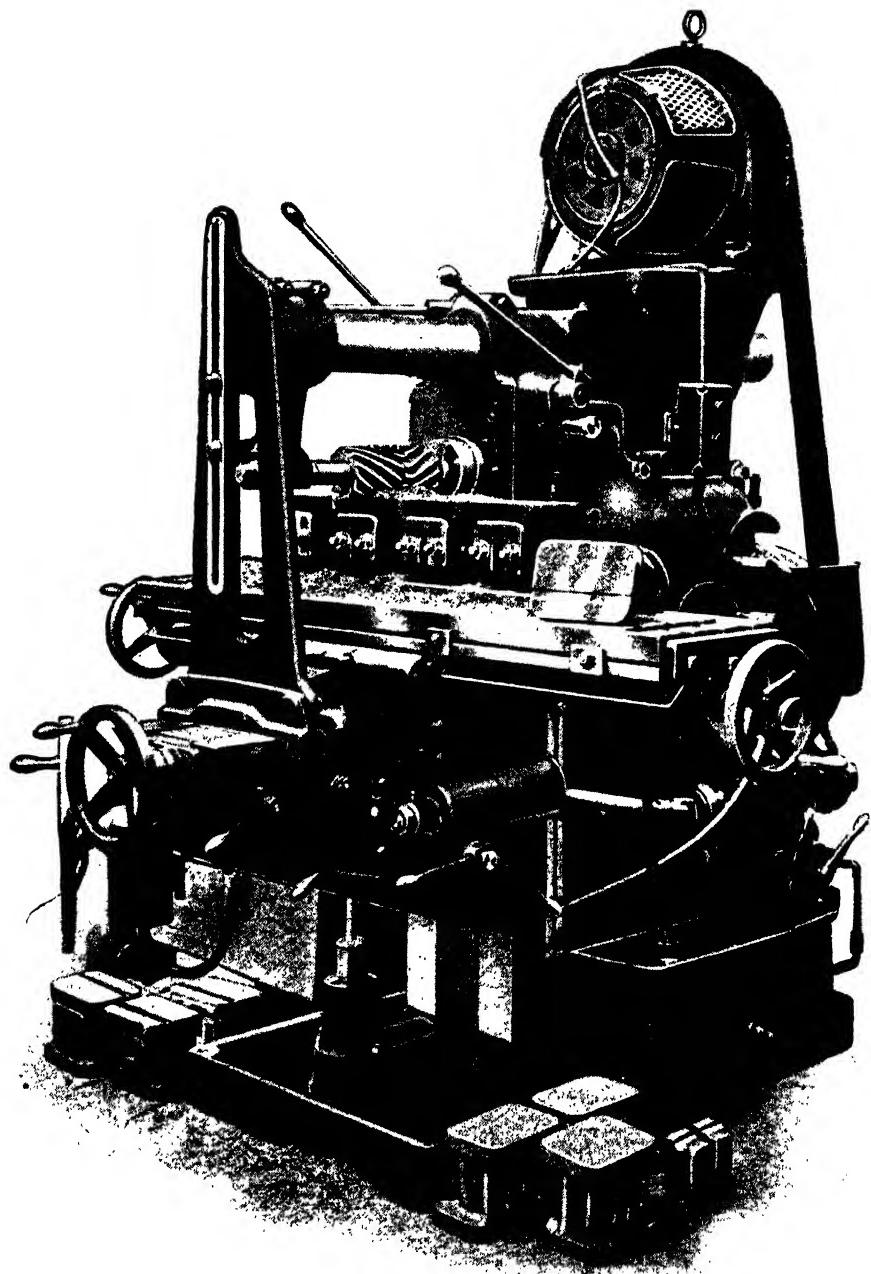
PARKINSON HORIZONTAL MILLING MACHINE IN OPERATION
